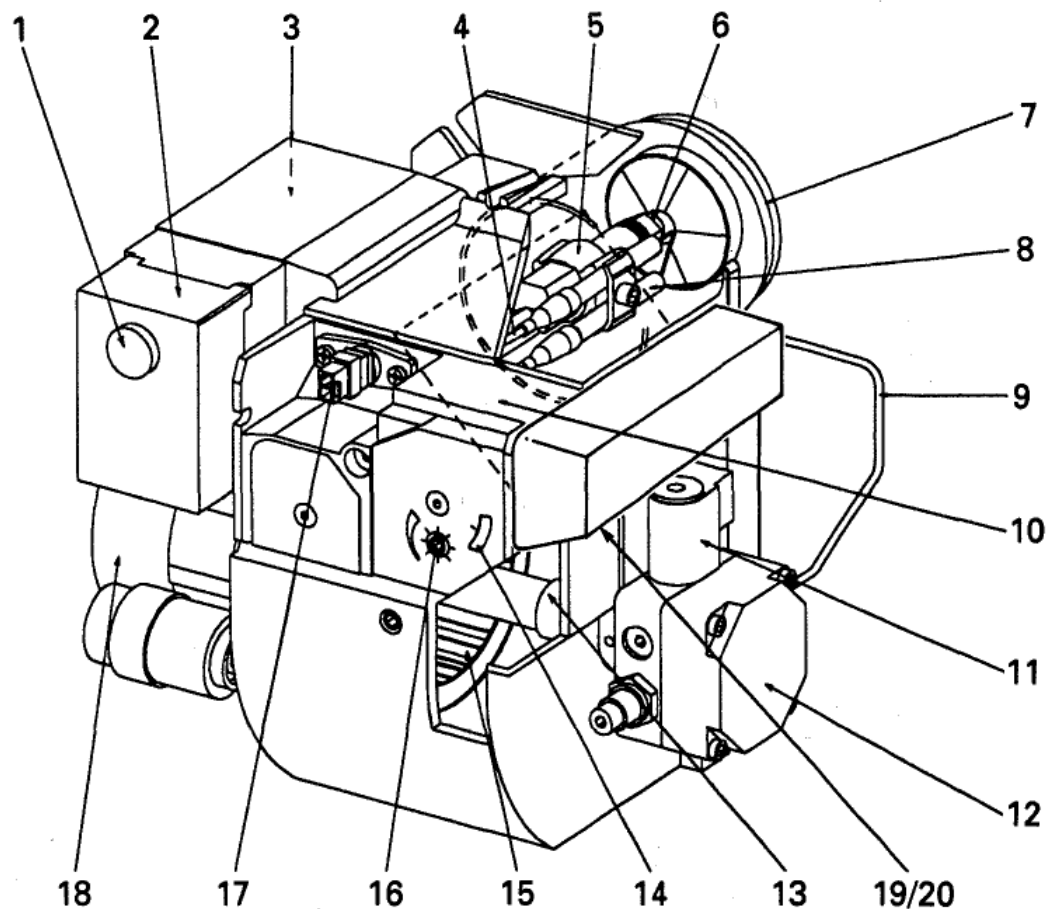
Electro Oil Sterling Burner (End Cover Removed)
